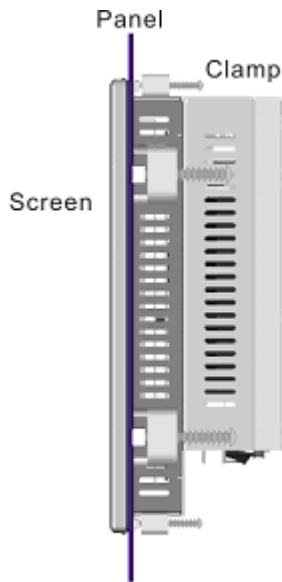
Tighten the Panel Mounting Clamp Screws
